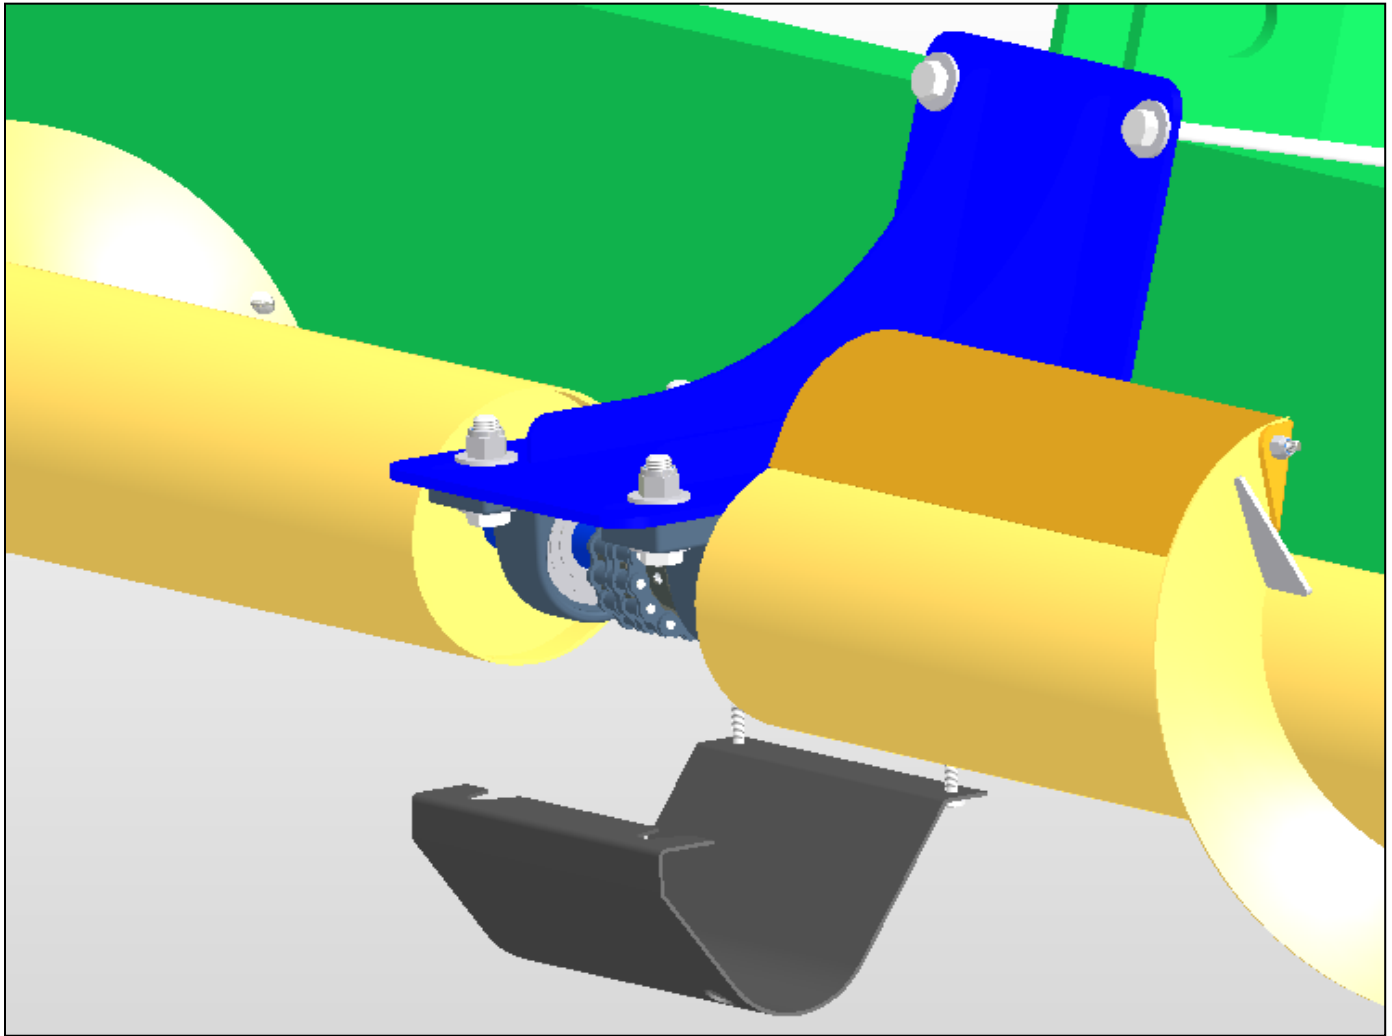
CENTER MOUNT 9XX SERIES AUGER SHOWING COUPLING AND COVER
